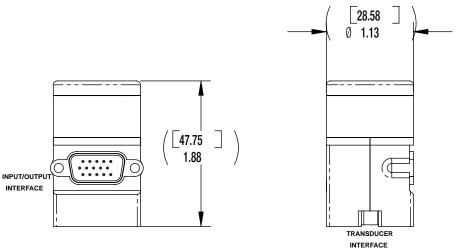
SLR Pressure Transducer Display Dimensional Drawing
